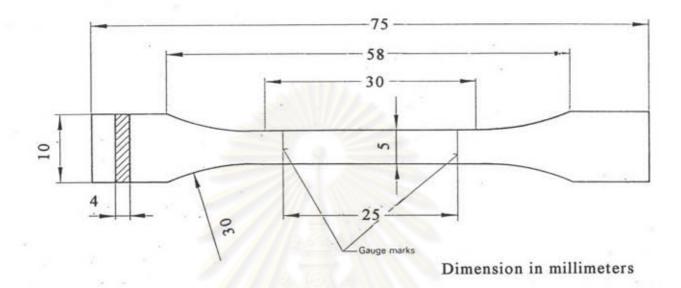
Standard dimensions mould of ISO/DIS 6239/1 tensile test specimen
